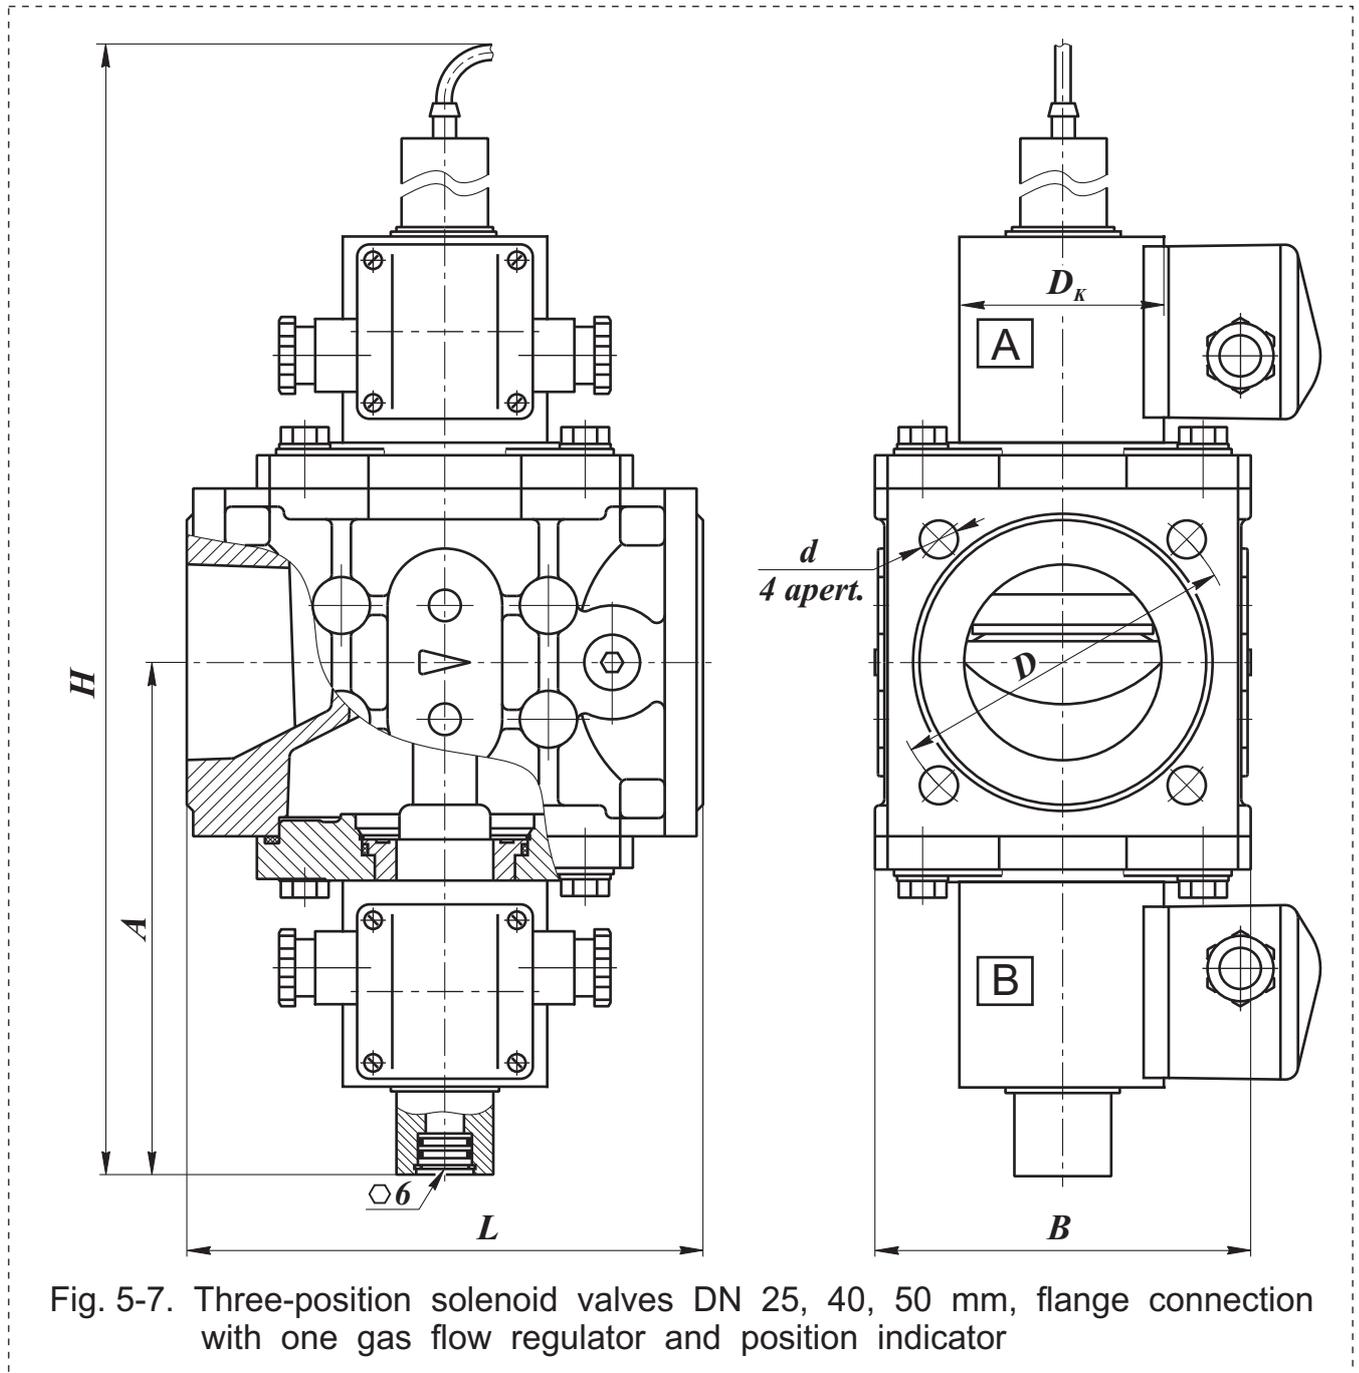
Three-position solenoid valves DN 25, 40, 50 mm, flange connection with one gas flow regulator and position indicator
